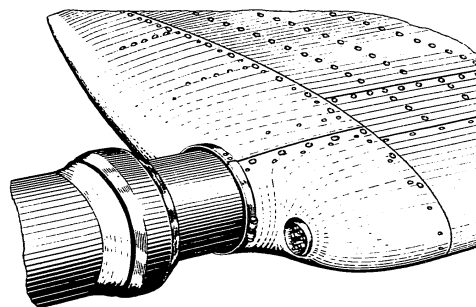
EXTERNAL VIEW OF BLADE ROOT FAIRING
